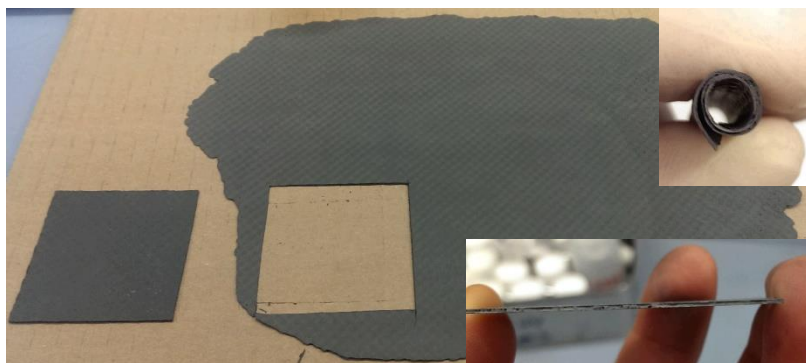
Upper left: First LaFeMnSi tape casted out of a 10 wt.% binder slurry. A small plate was cut out. Upper right: the plate rolled down to a 1.2 mm bending radius. Lower image: sintered tape.
